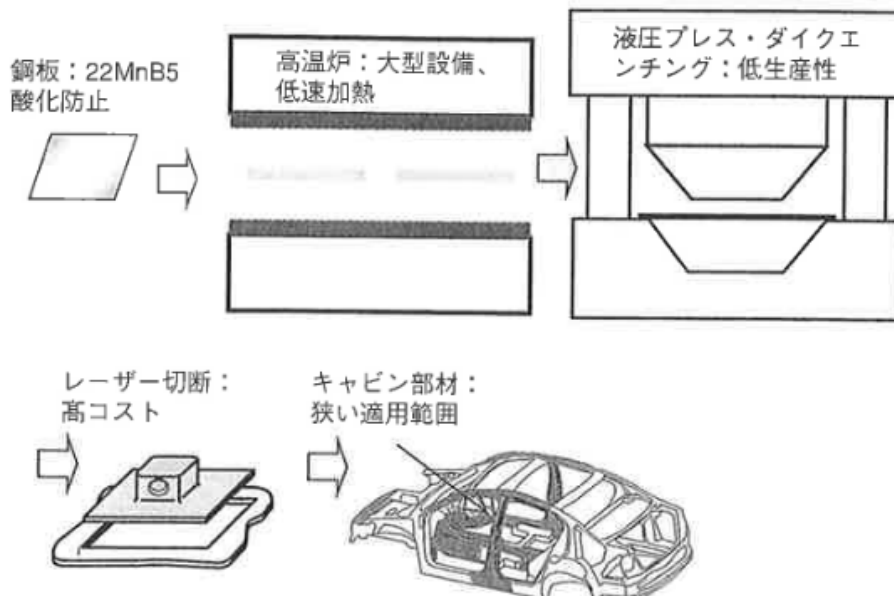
Manufacturing process of hot stamped parts ¹⁻²⁶⁾
